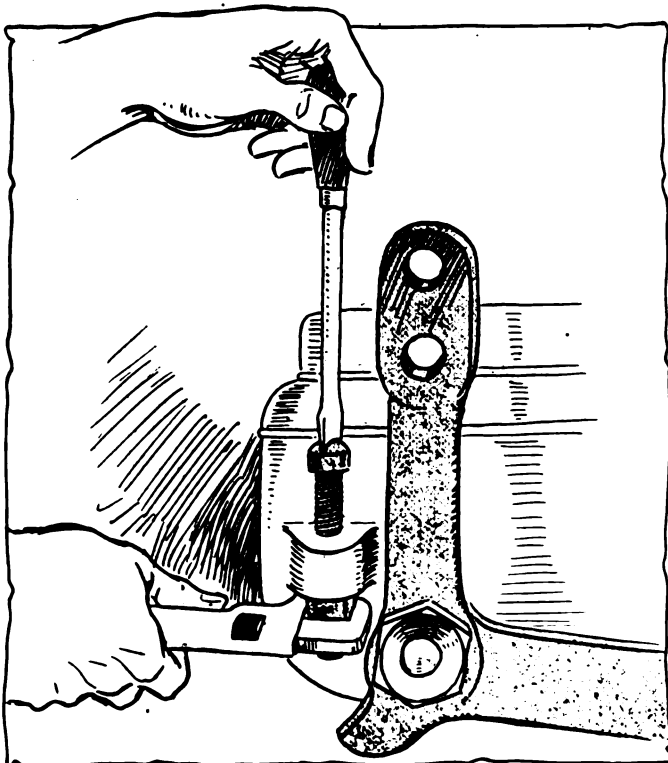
This screw to be adjusted so motor will run with throttle closed
